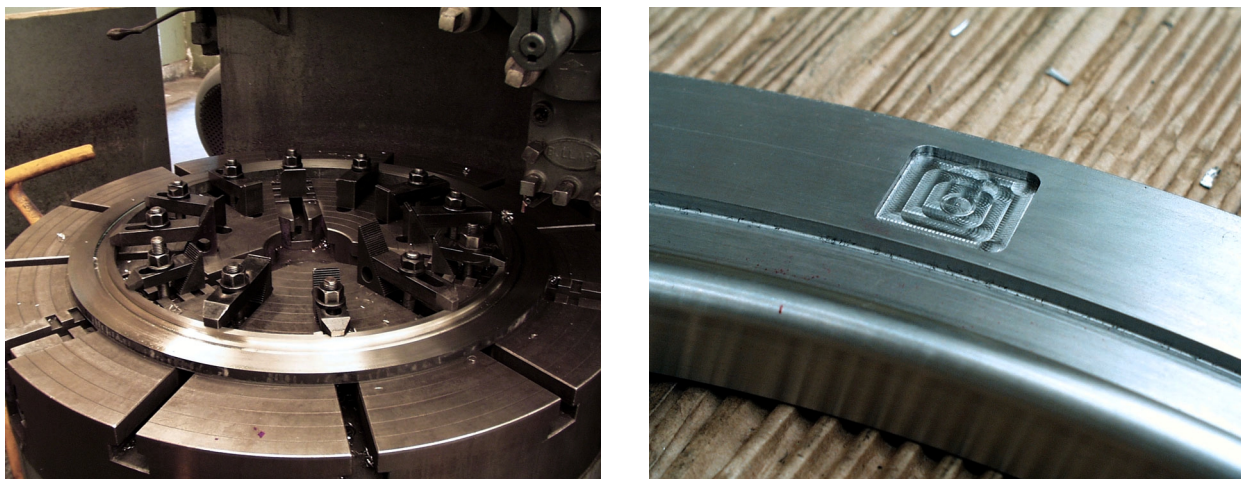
The LEBT slip flange during machining (left), and a detail of the flange pocket (left).
